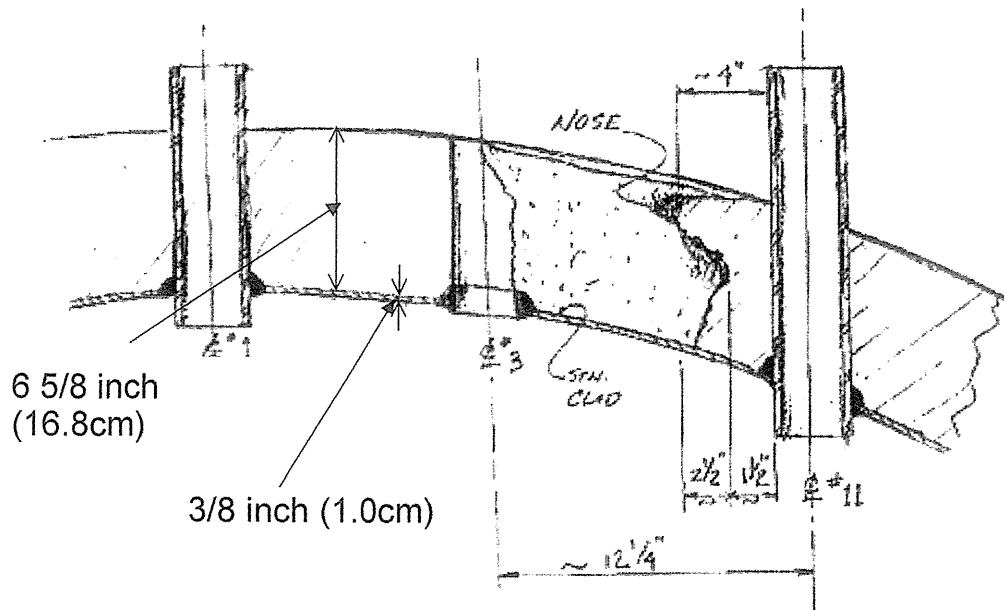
Cutaway View of Cavity in Reactor Vessel Head (4,14)
